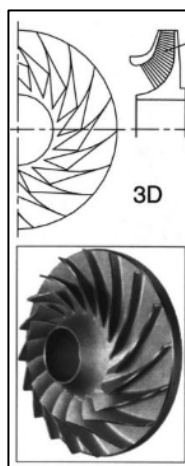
16 3D-impeller, shrouded with twisted backward-curved blades.[3]
